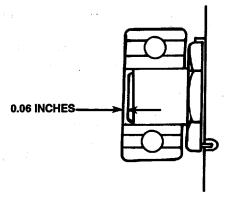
Pilot Bearing (PTO/SL-111).
